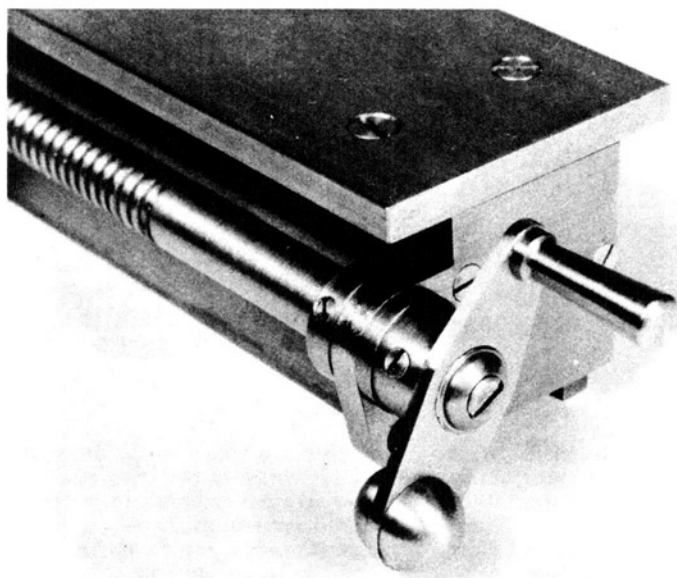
Assembled lead screw, tail end bearing, and simplified balanced ball handle.
